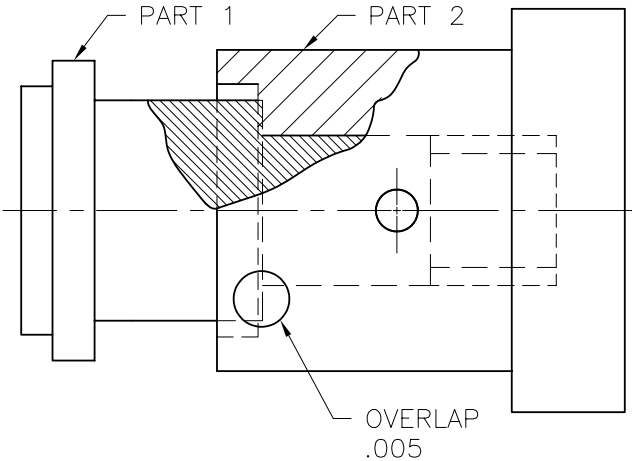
Assembly drawing after attaching Part-1 and Part-2
